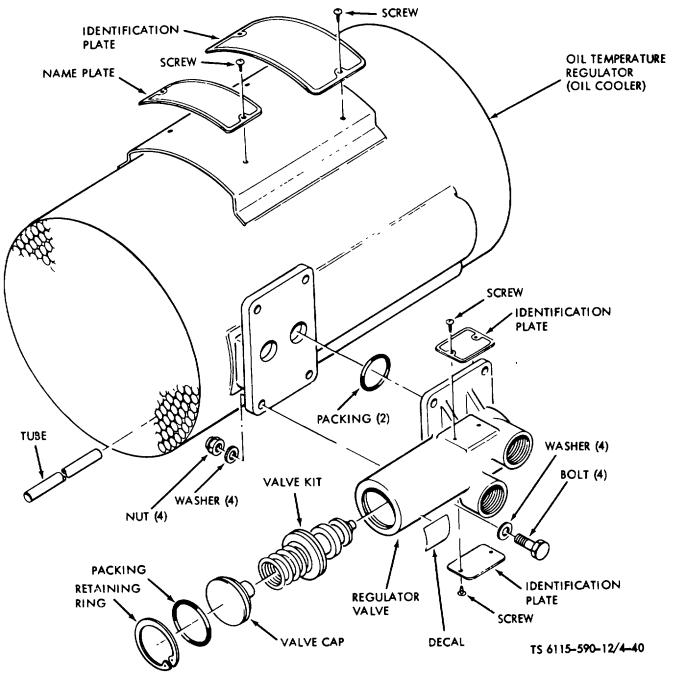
Oil Cooler and Regulator Assembly (TS 6115-590-12/4-40)
